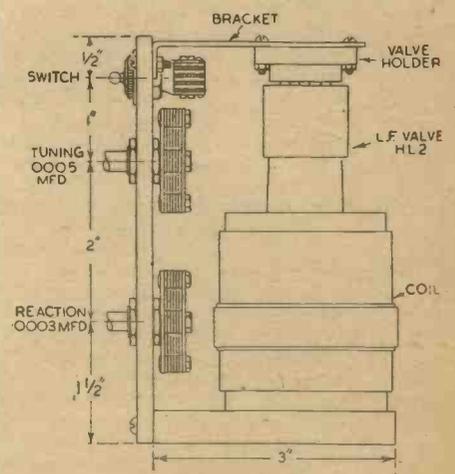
Side view, showing valve-holder bracket which supports the L.F. valve within the coil.
